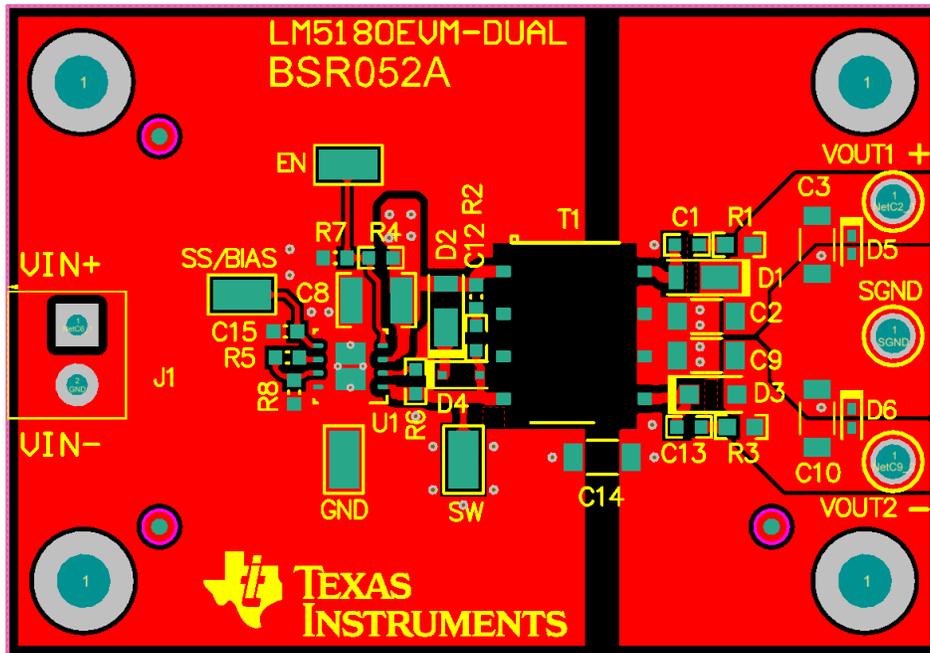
LM5180-Q1 Dual-Output PCB Layout
